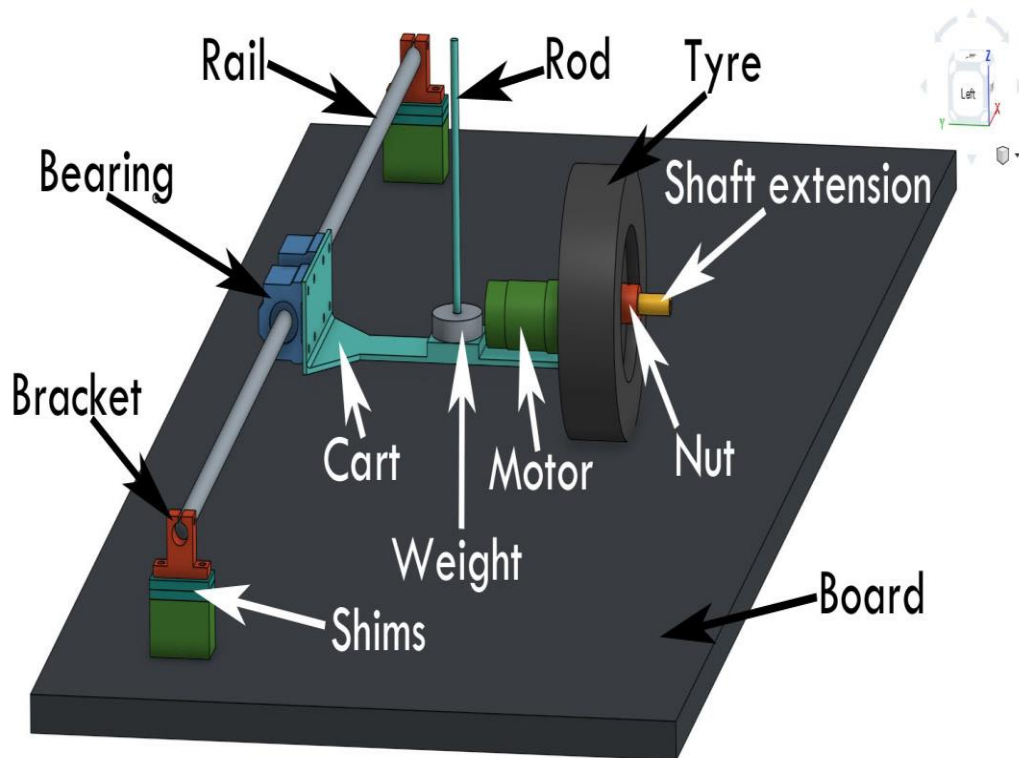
A single-wheel bench-top rig used for the dynamic tests.
